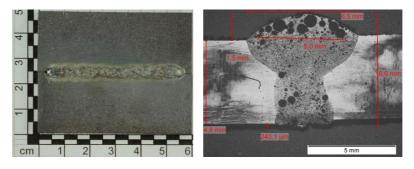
Welding of wire cut – wire cut: surface of weld & cross section
